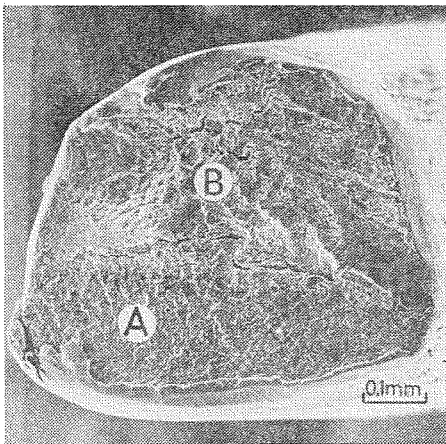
(b) Fracture surface of a wire in the rope shown in Photo 6(a)
